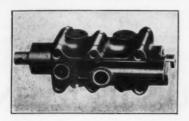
Die cast in aluminum alloy 66, these castings for hydraulic pressure pump control valves must withstand 1800 psi pressure.
